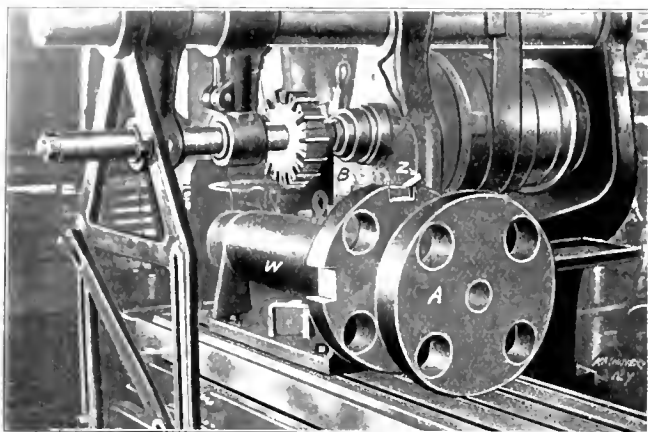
Testing the Accuracy of the Slots in the Indexing Blocks, using a Test Block fastened to the Fixture.
